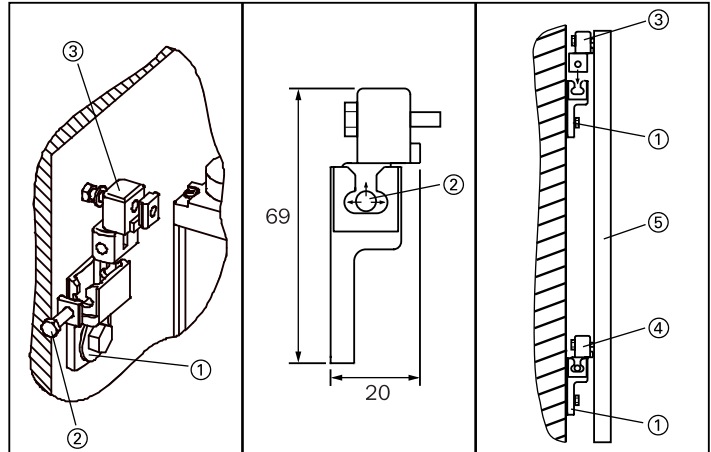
Side fixture for C 2000, M 2000 and M 2000-A/P
